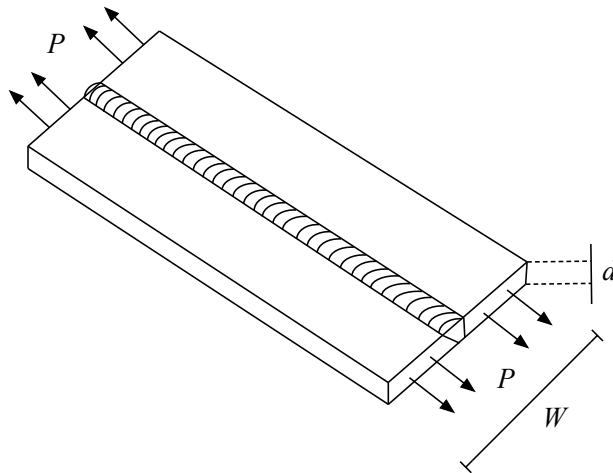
Loading parallel to the weld. Based on the ideas of Myhr et al. [49].
